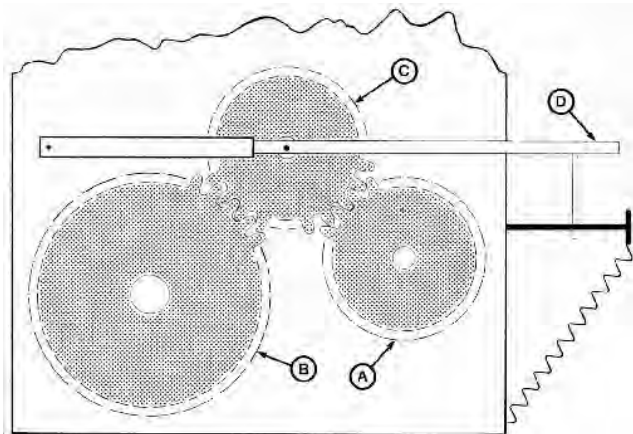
Multiple Speed Gearbox for Adjusting the Application Rate: (A) drive gear, (B) driven gear, (C) idler gear, (D) selection lever.
